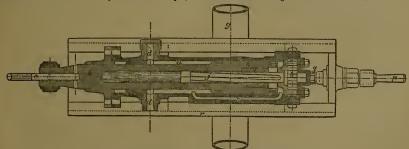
Horizontal Section of Darhington's Rock-Drill.-Scale 14.
